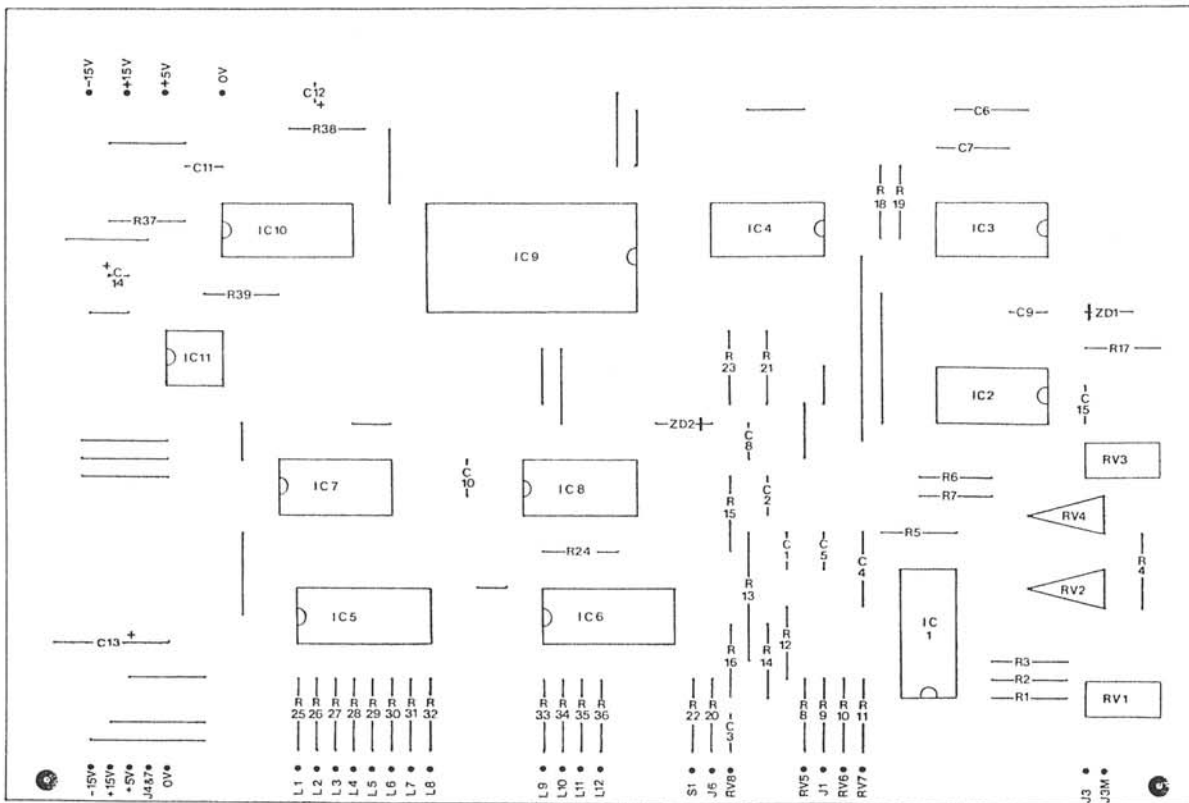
80-21 PCB COMPONENT LAY-OUT
